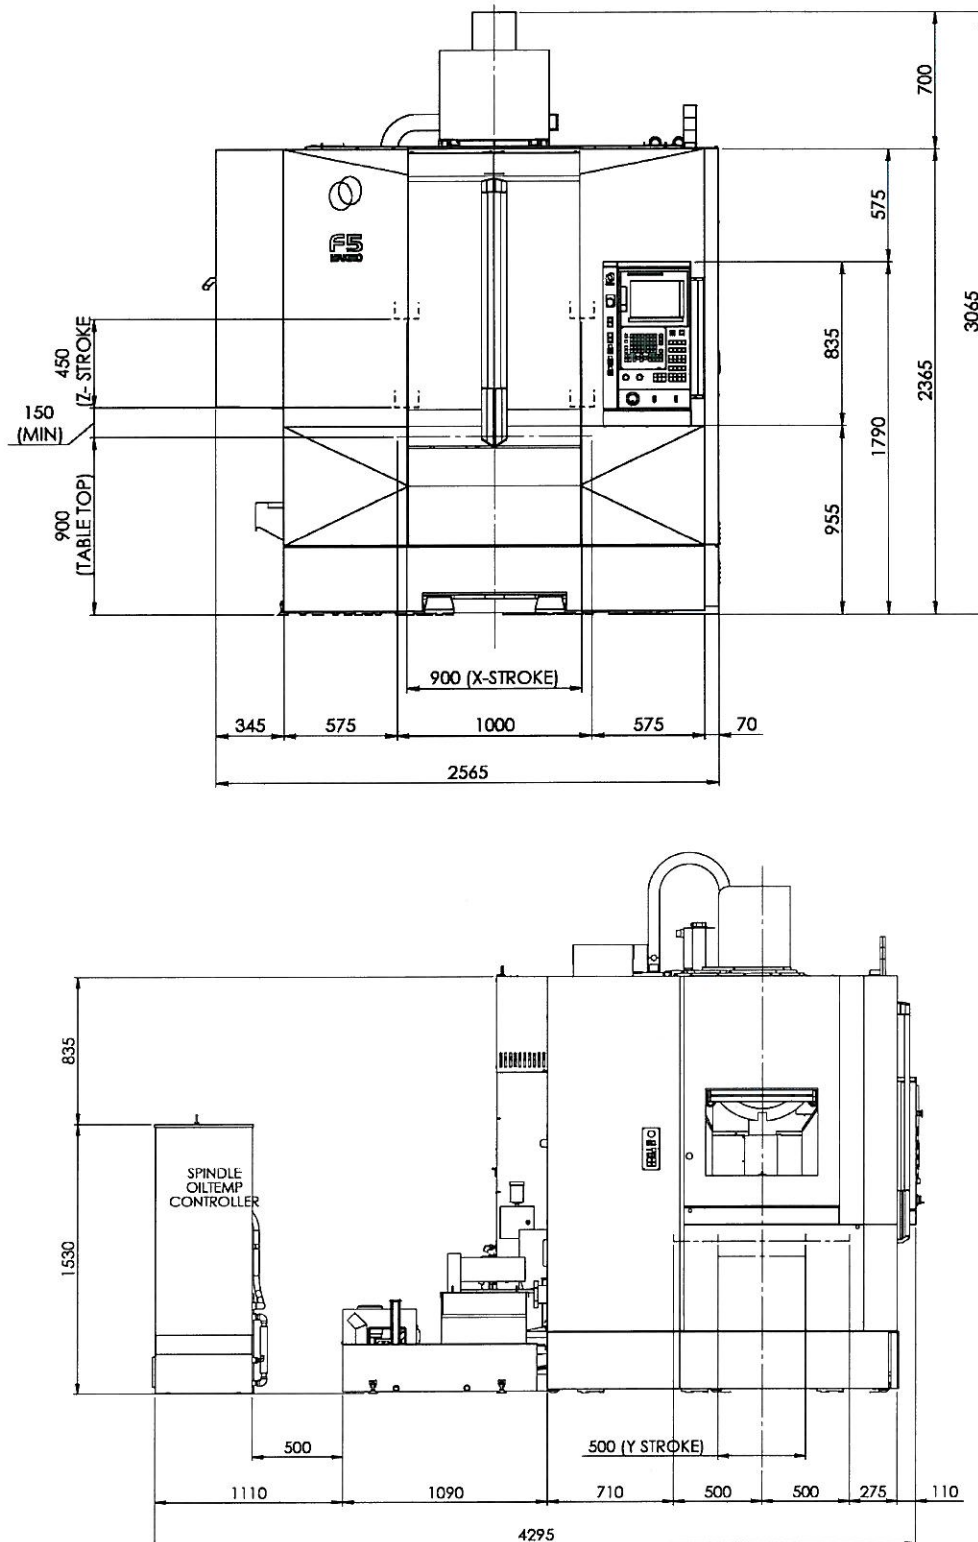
F5 Front and Side View (Rear Tank)
